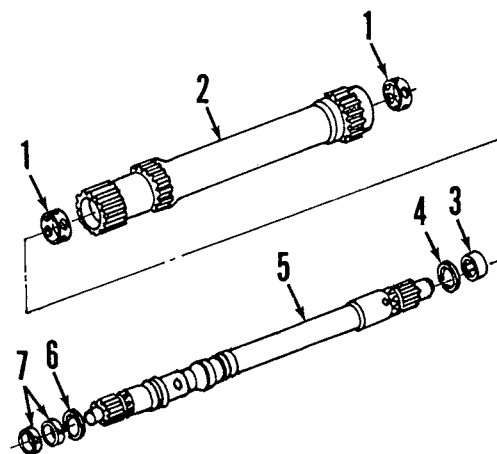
Exploded view of Power Shift transmission low and high range drive shafts. The pilot needle bearing (3) for low range shaft is located in the traction clutch front drum.
